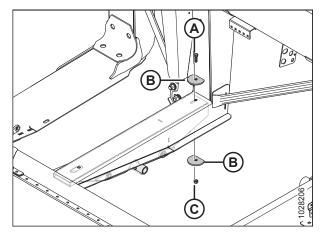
Inboard Arm Assembly and Left Header Leg – View from Above
